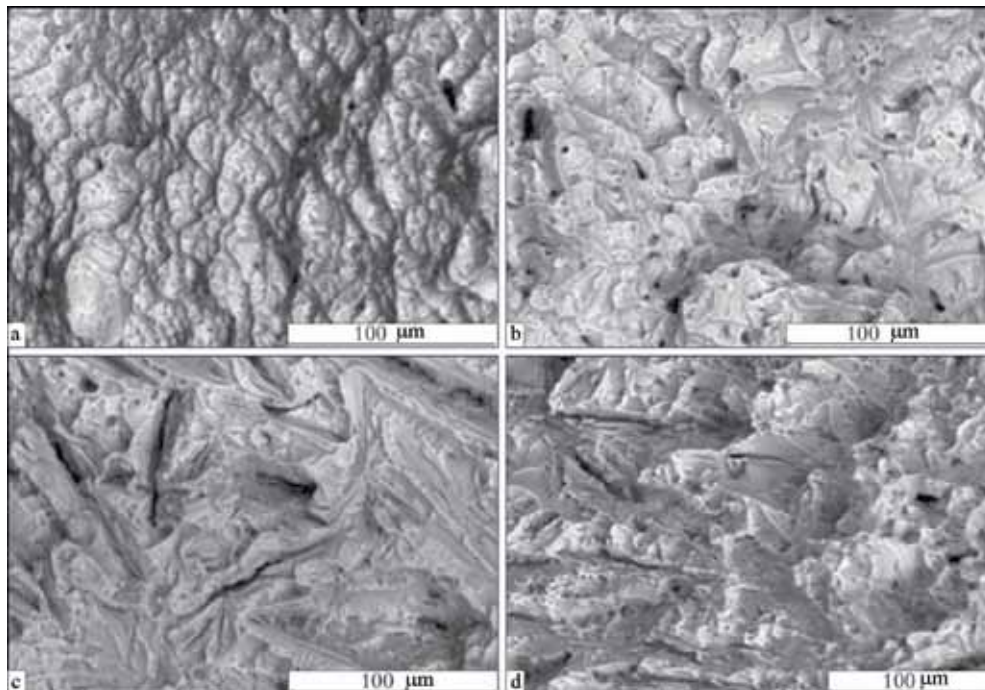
Fractographs of fracture surfaces of the titanium specimens after mechanical tests, for a–d refer to Fig. 6, a–c) $\times 500$; c) $\times 400$.
